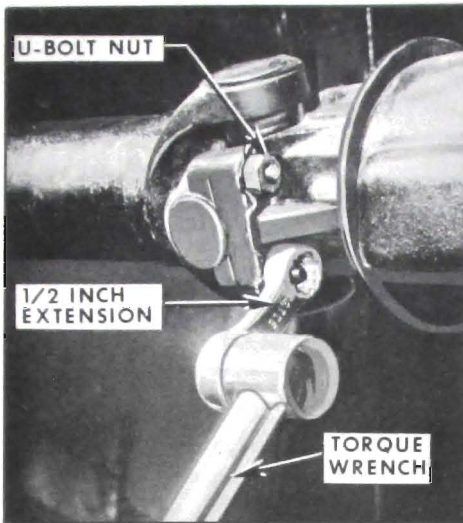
Using Extension to Torque U-Bolt Clamps
